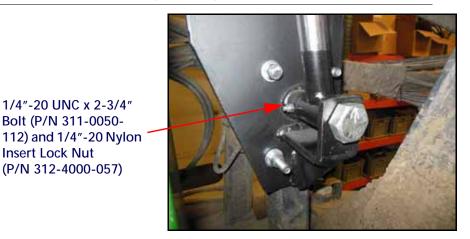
Base-End of Hydraulic Cylinder Installed
